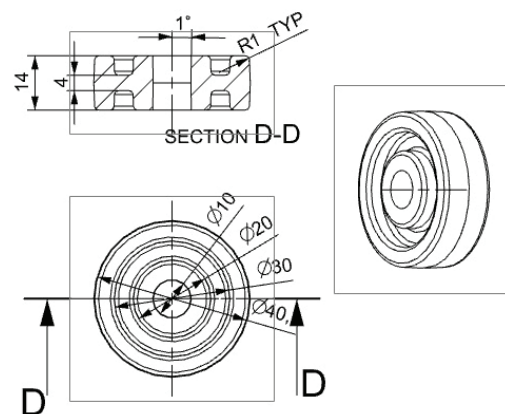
Dimensional Details of the Component (All dimensions are in mm)
